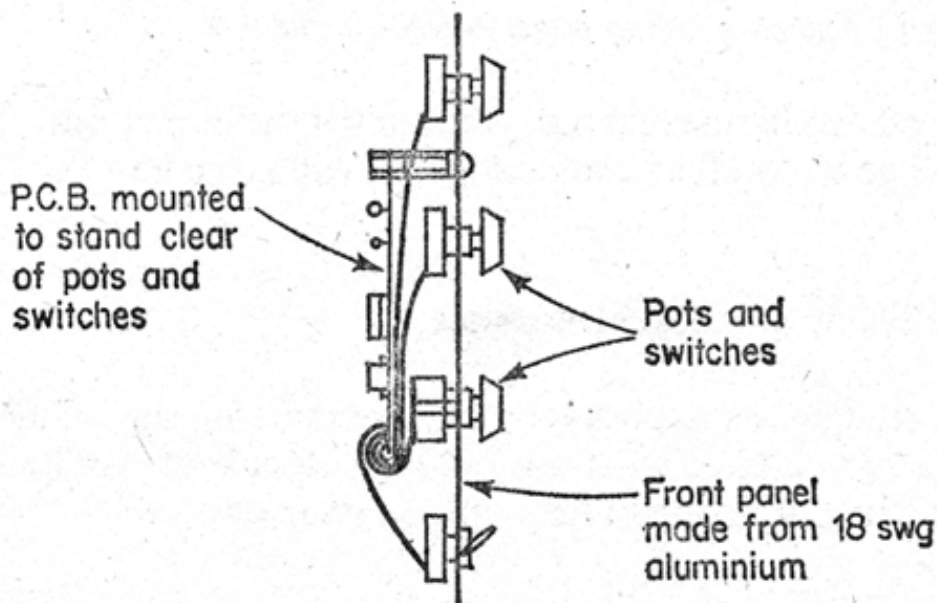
Diagram showing method of panel assembly (not to scale)
